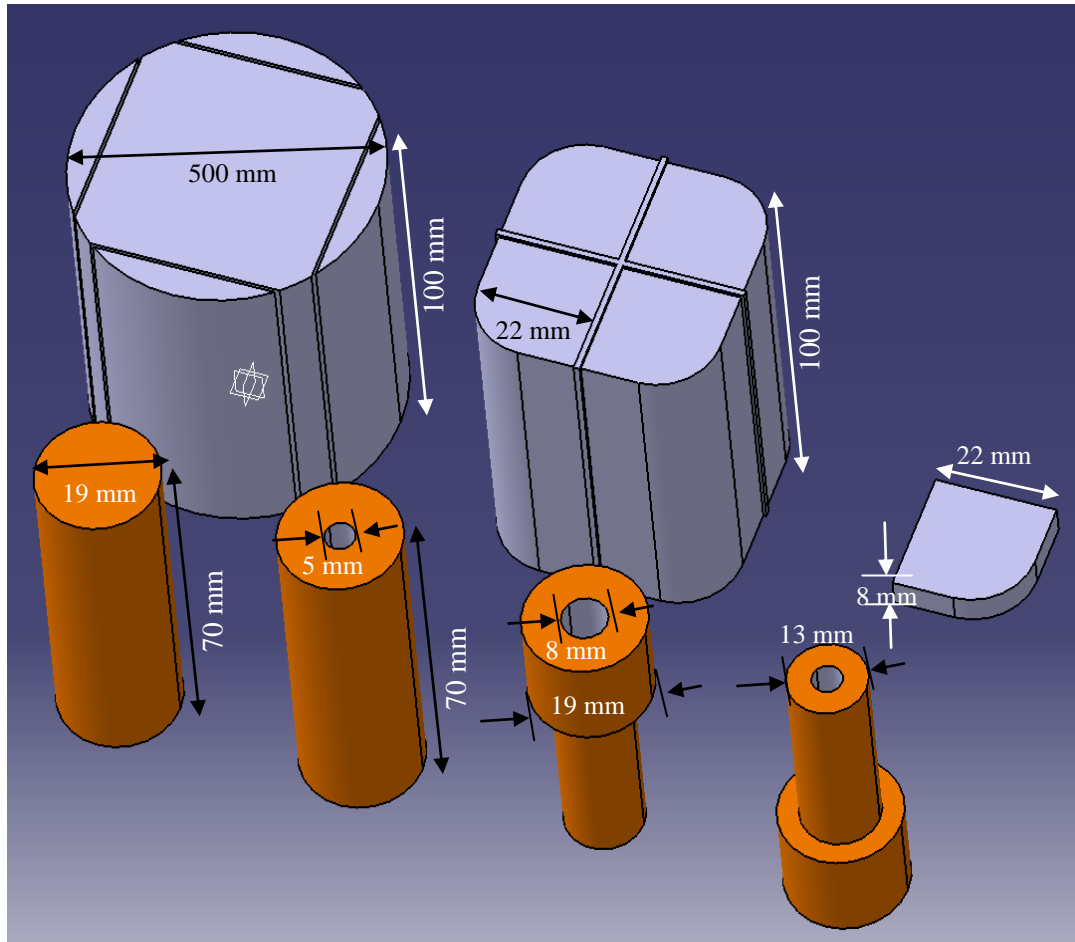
Copper electrode and cemented Tungsten carbide workpiece specimen preparation using lathe machining and wire cut EDM respectively.
